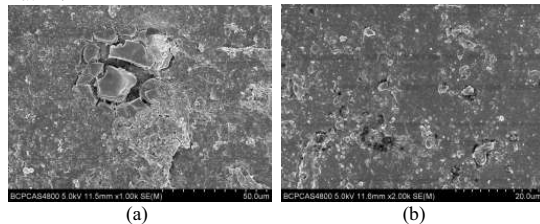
Microdefects of the machined surfaces. (a) fracture of SiC_p and micro cracks; (b) pits formed by pulling out of SiC_p .
